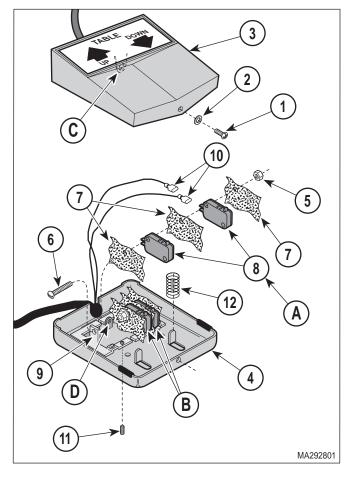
TABLE UP or TABLE DOWN Switches Removal / Installation / Adjustment
